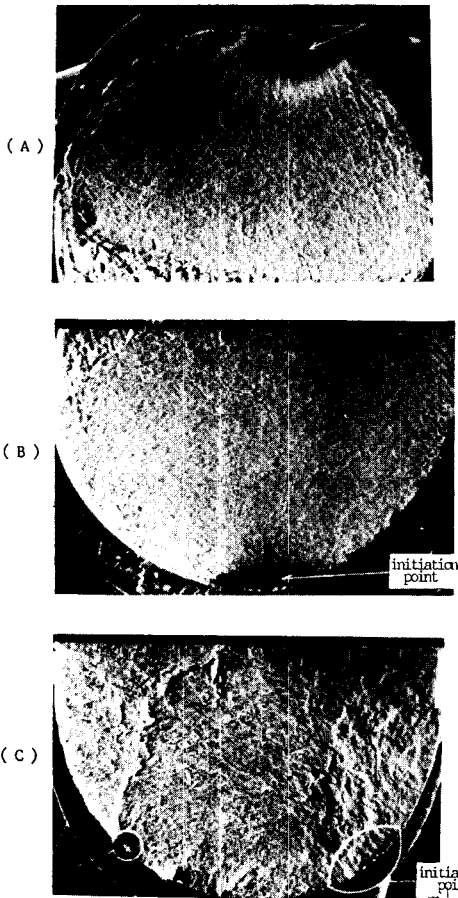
Macroscopic fractographies of the low cycle fatigue fracture surface(SM41B)
